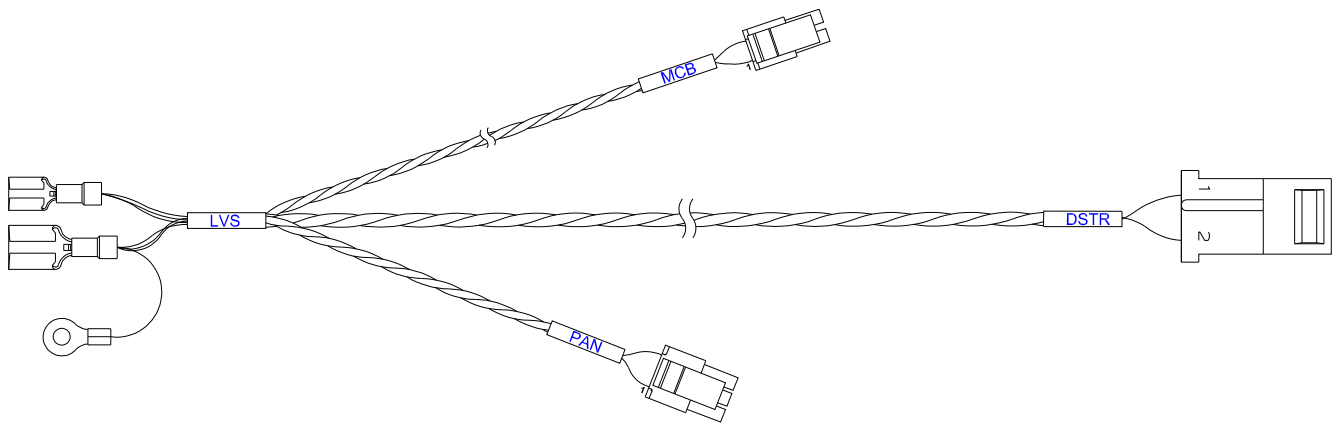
VL4000 Color A to Color B Cable Assembly
